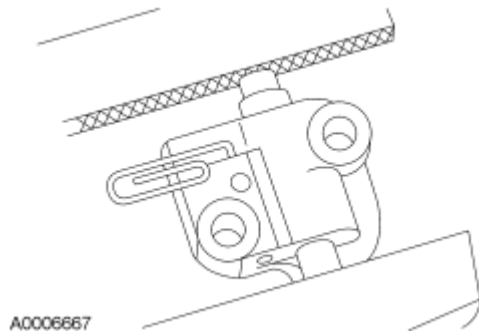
Retaining Tensioner Piston With 1.5-mm (0.06-in) Wire Or Paper Clip
